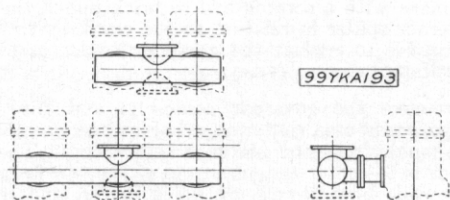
Water Cooled Welded Manifold Arrangement
